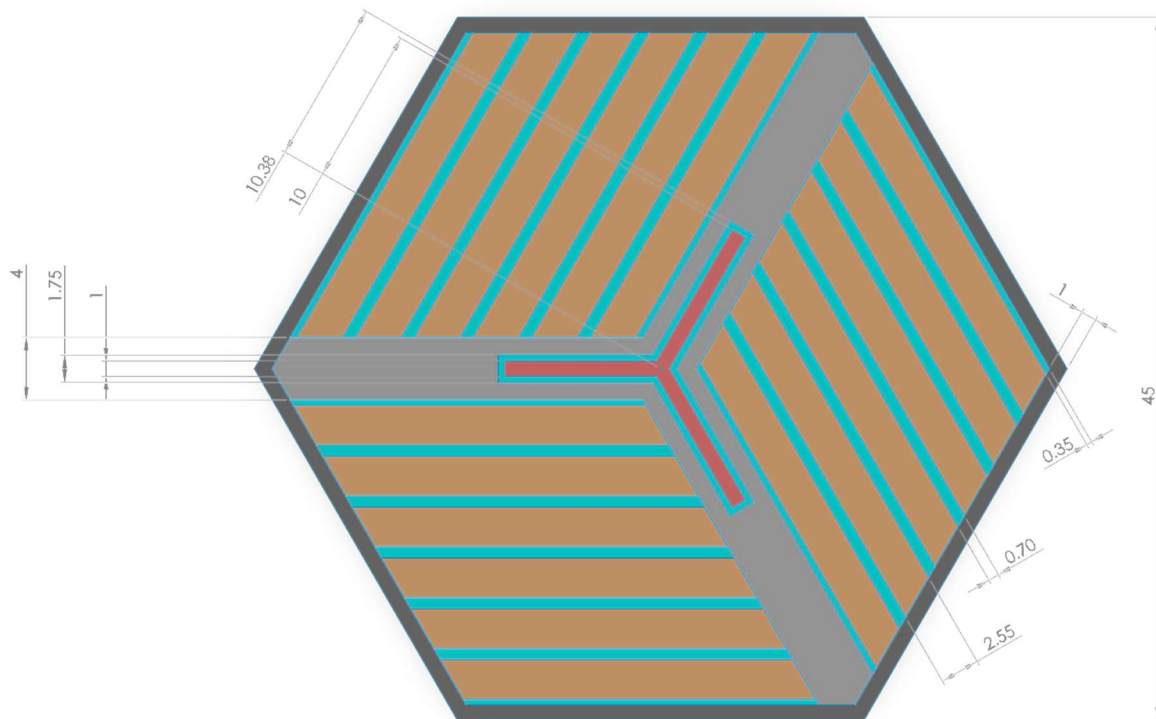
AHTR fuel assembly reference dimensions. (Varma, et al., 2012)
